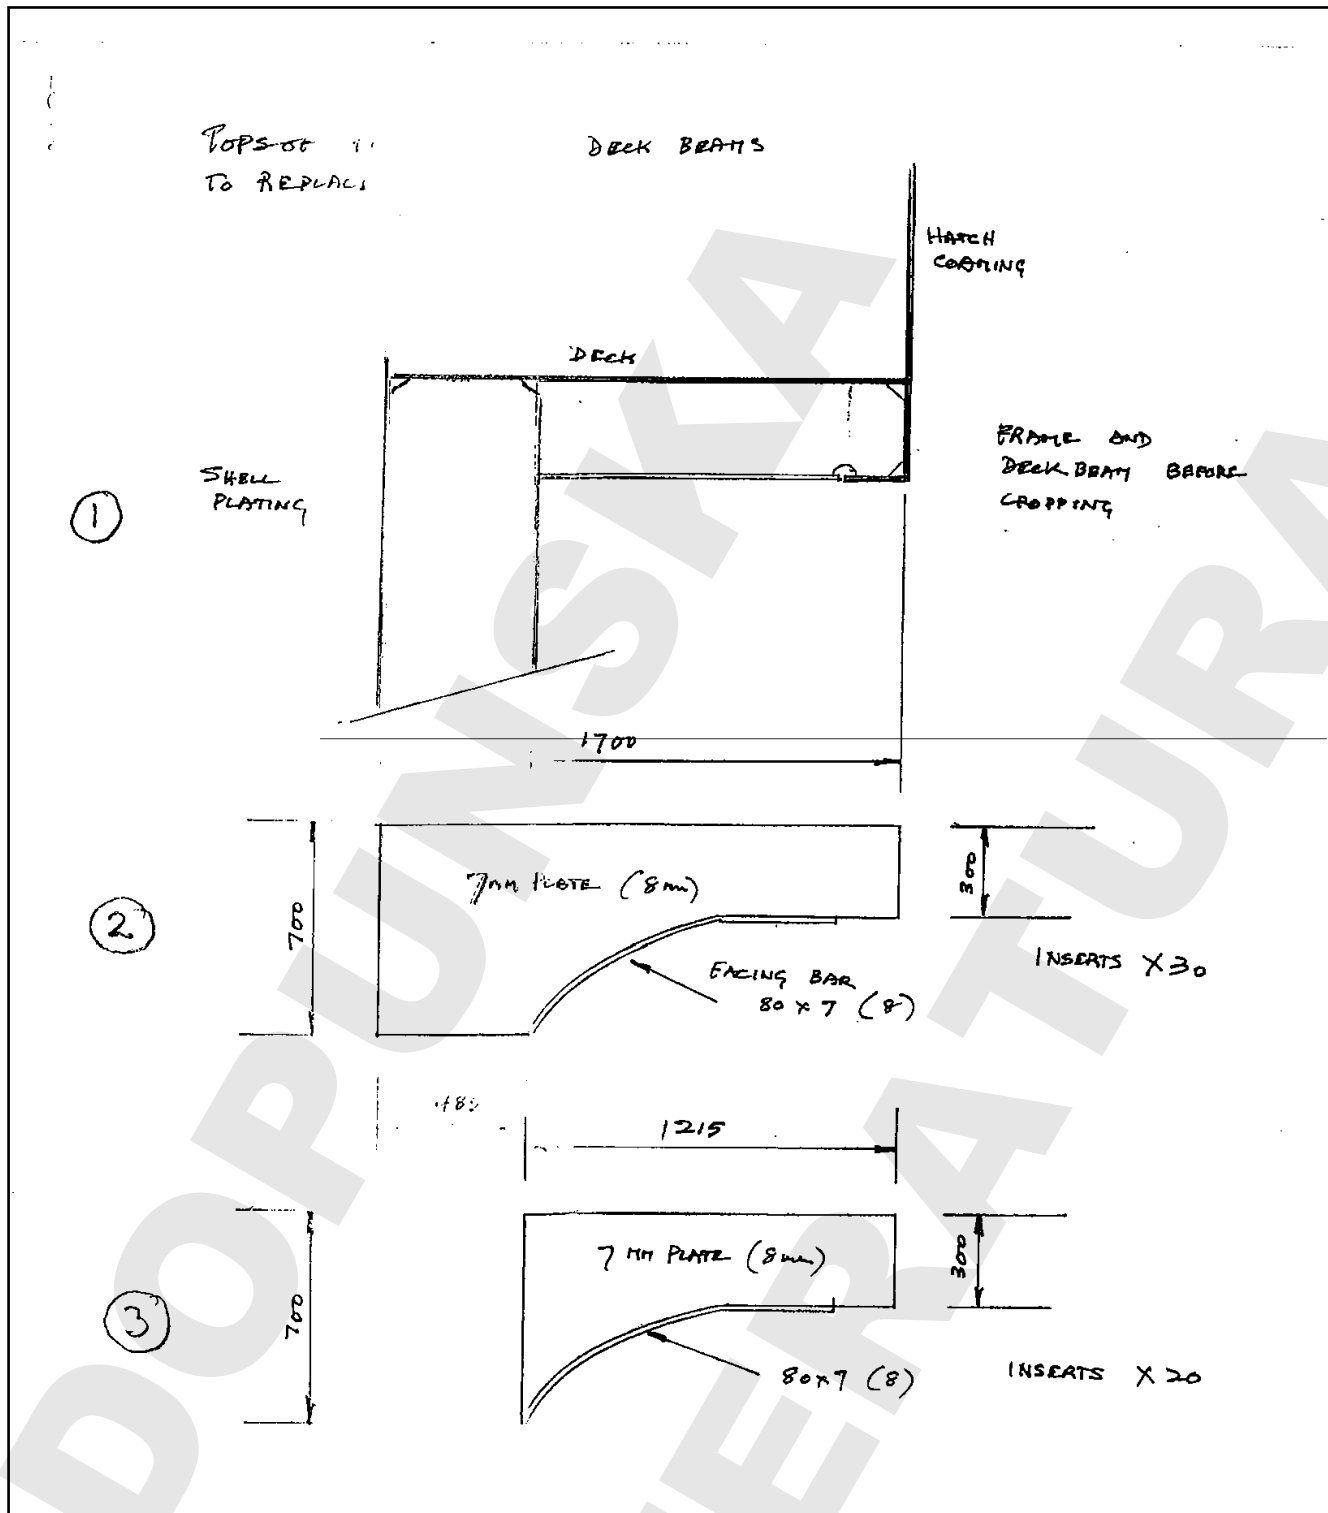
Contemporaneous sketch of modifications to cargo hold deck beams carried out in 2003
